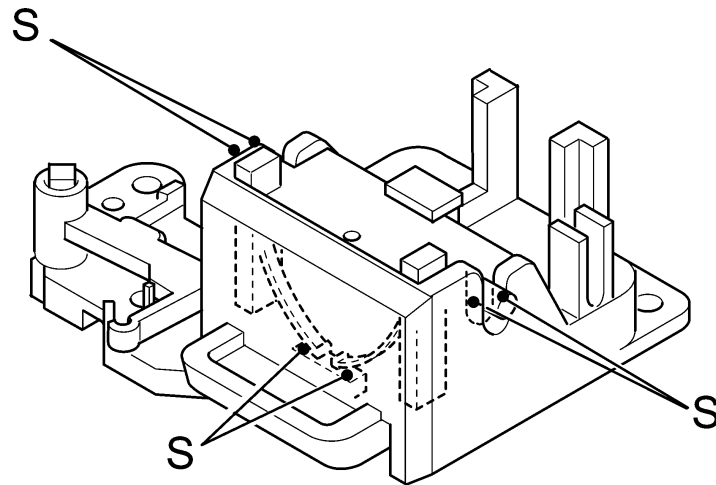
Sliding Surfaces of T-cutter Unit and T-paper Guide
